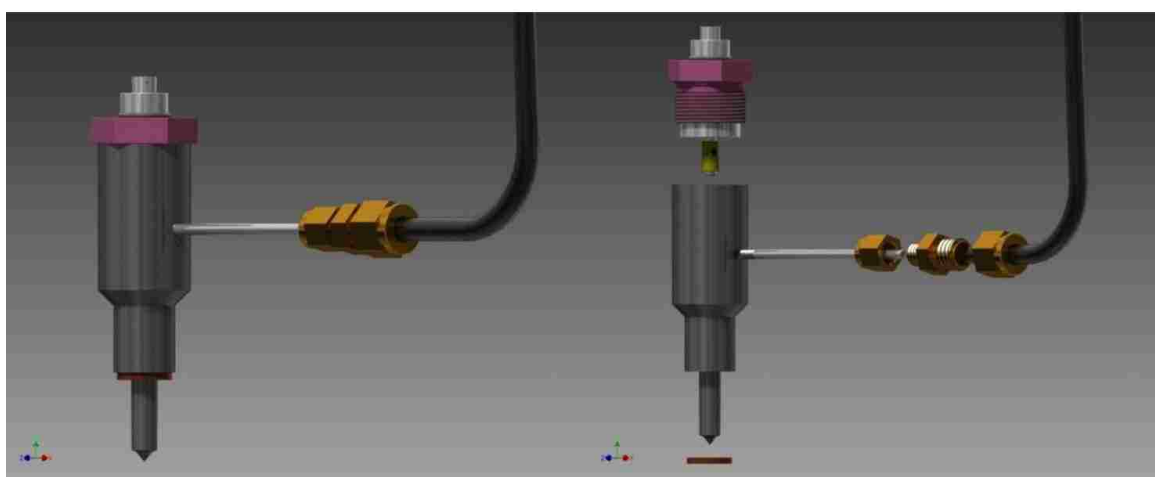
Residual Gas Injector Solid Model, Assembled and Exploded View
